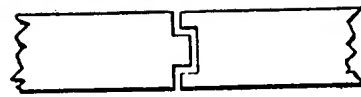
Method of filling large aluminum parts for soldering. A small pointed flame should be used.
